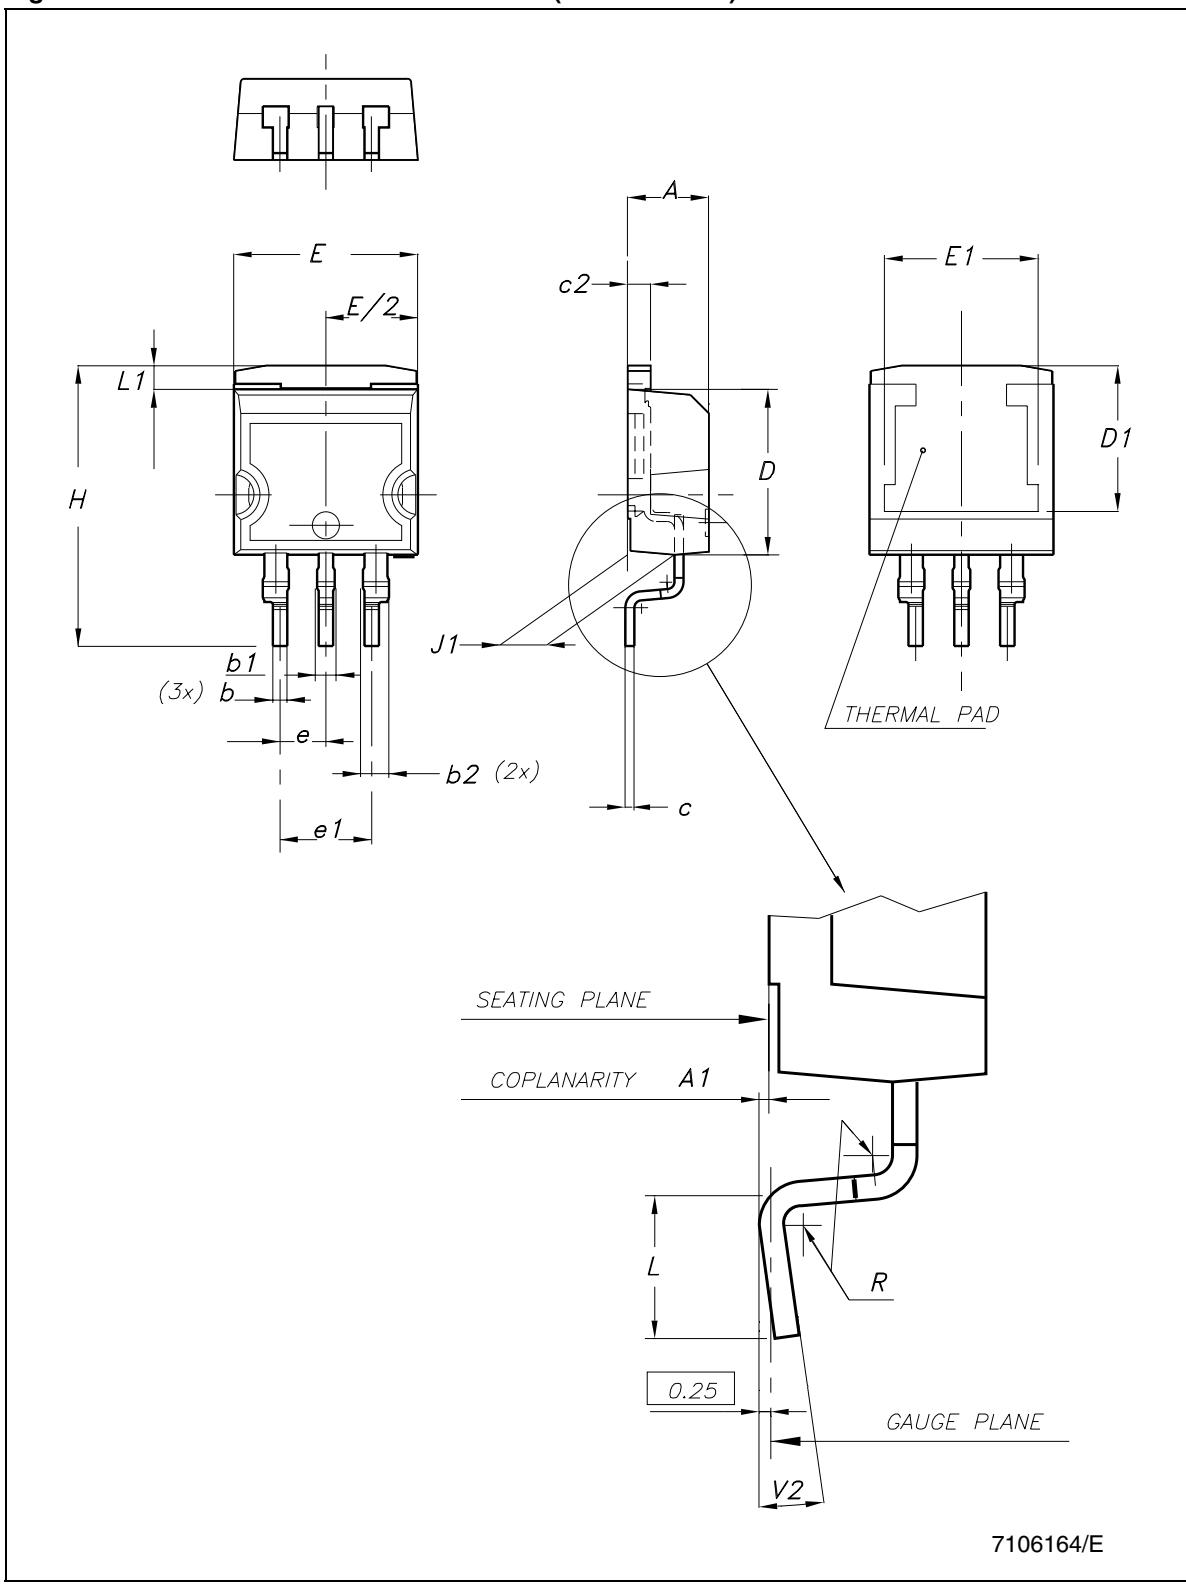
DRAWING DIMENSION D²PAK/A (TYPE STD-ST)
